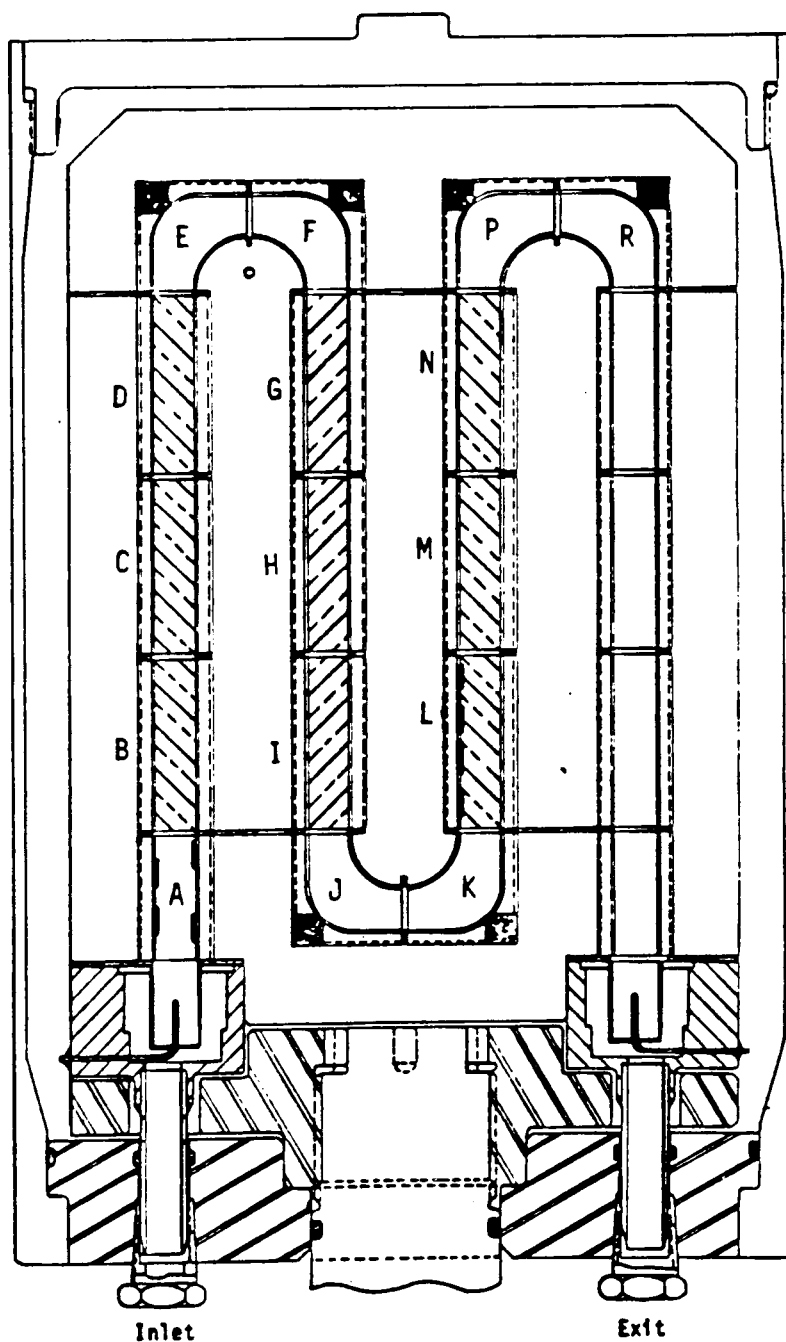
Cross Sectional View of Coolant Passage Heat Transfer Model Assembly With Skewed Trip Rough Walls
